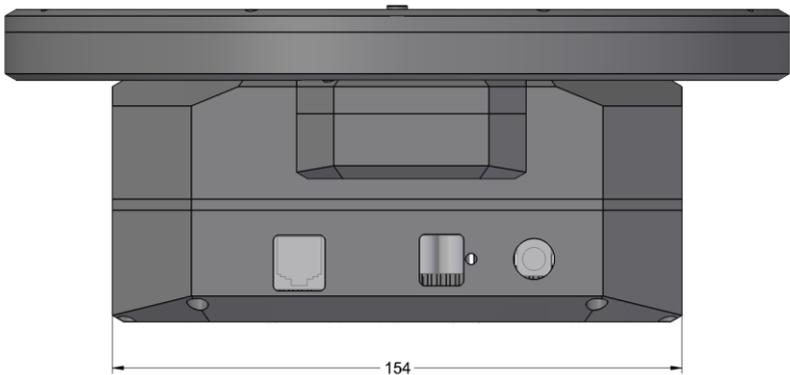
C3 camera head with External filter wheel bottom view dimensions
